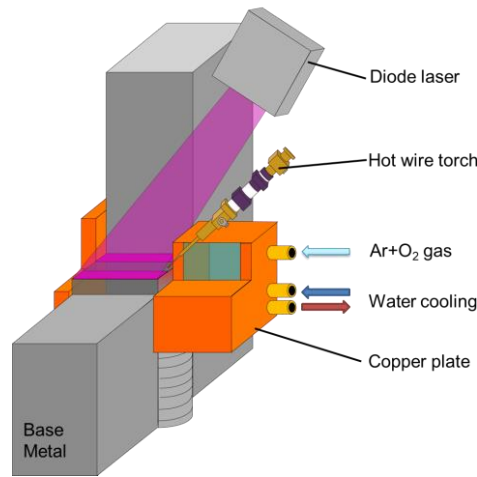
Illustration of single-pass vertical welding using hot-wire laser.
